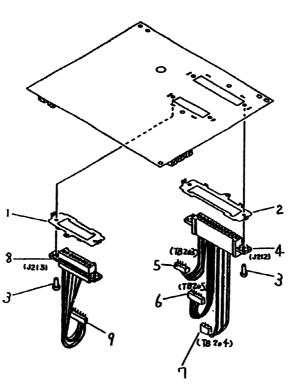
A: DC Controller P.C.B. Assembly (RG1-2706-050)
